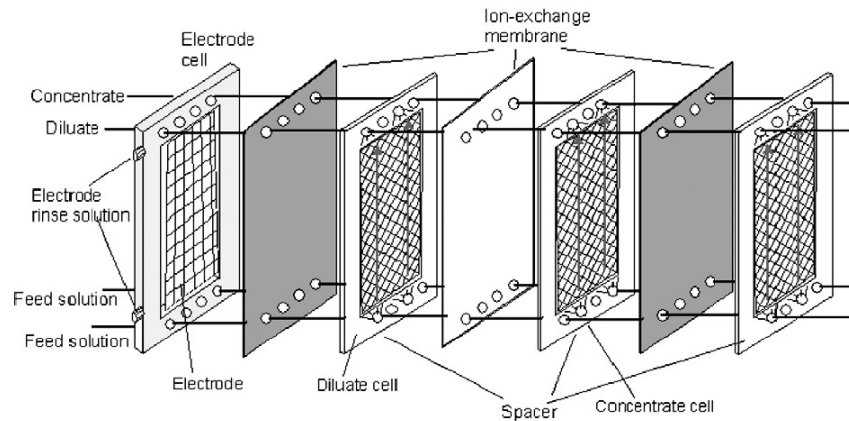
Scheme of stack construction design (Strathmann 2010)
